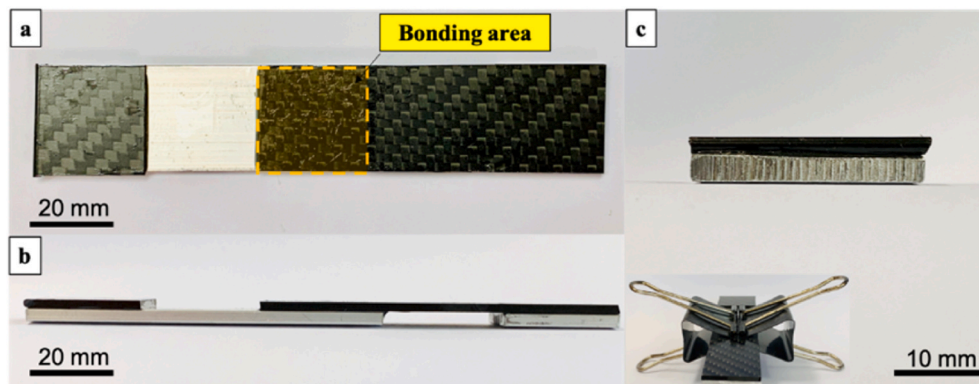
Adhesive bonded CFRP/Al specimen for SLS test.
